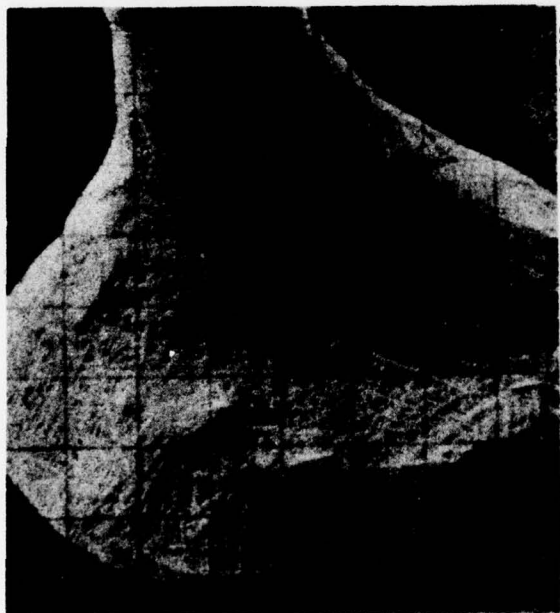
X50. Typical 90Pb 10Sn Solder Joint in the As Soldered Condition
